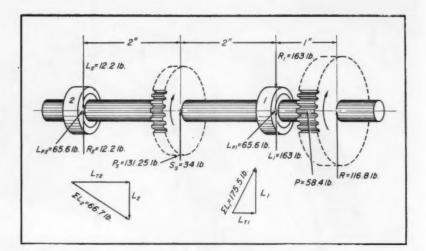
FORCES and bearing loads on shaft 1 of the example.
